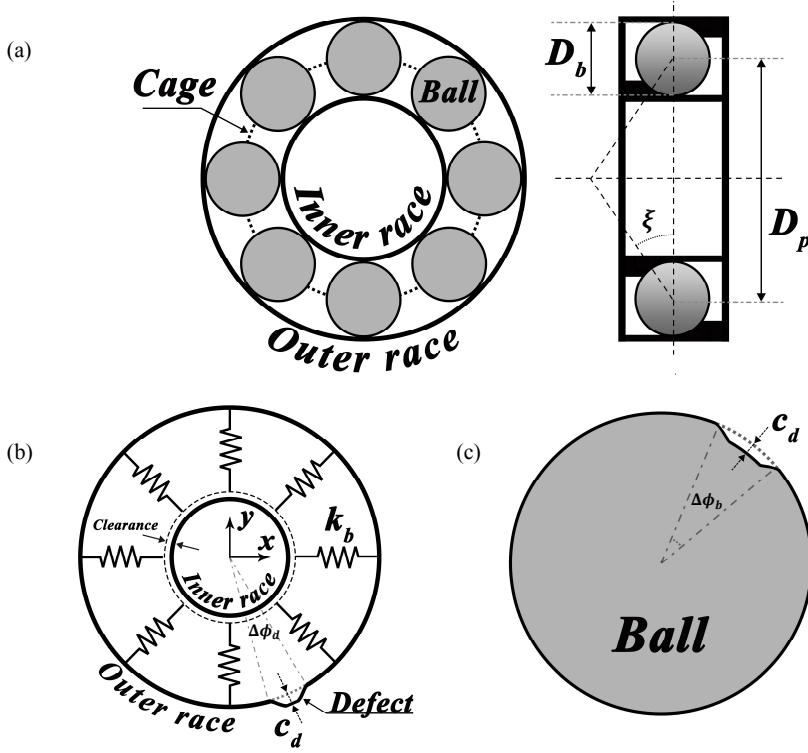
Bearing schematic: (a) bearing components; (b) lumped spring-mass model of bearing and defect model on the outer race; (c) rolling element defect
